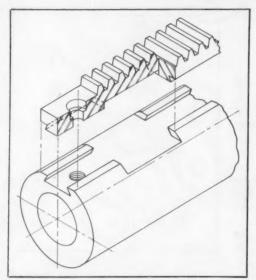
In this design, both the dovetail on the rack and in the sleeve are milled away to facilitate assembling.
